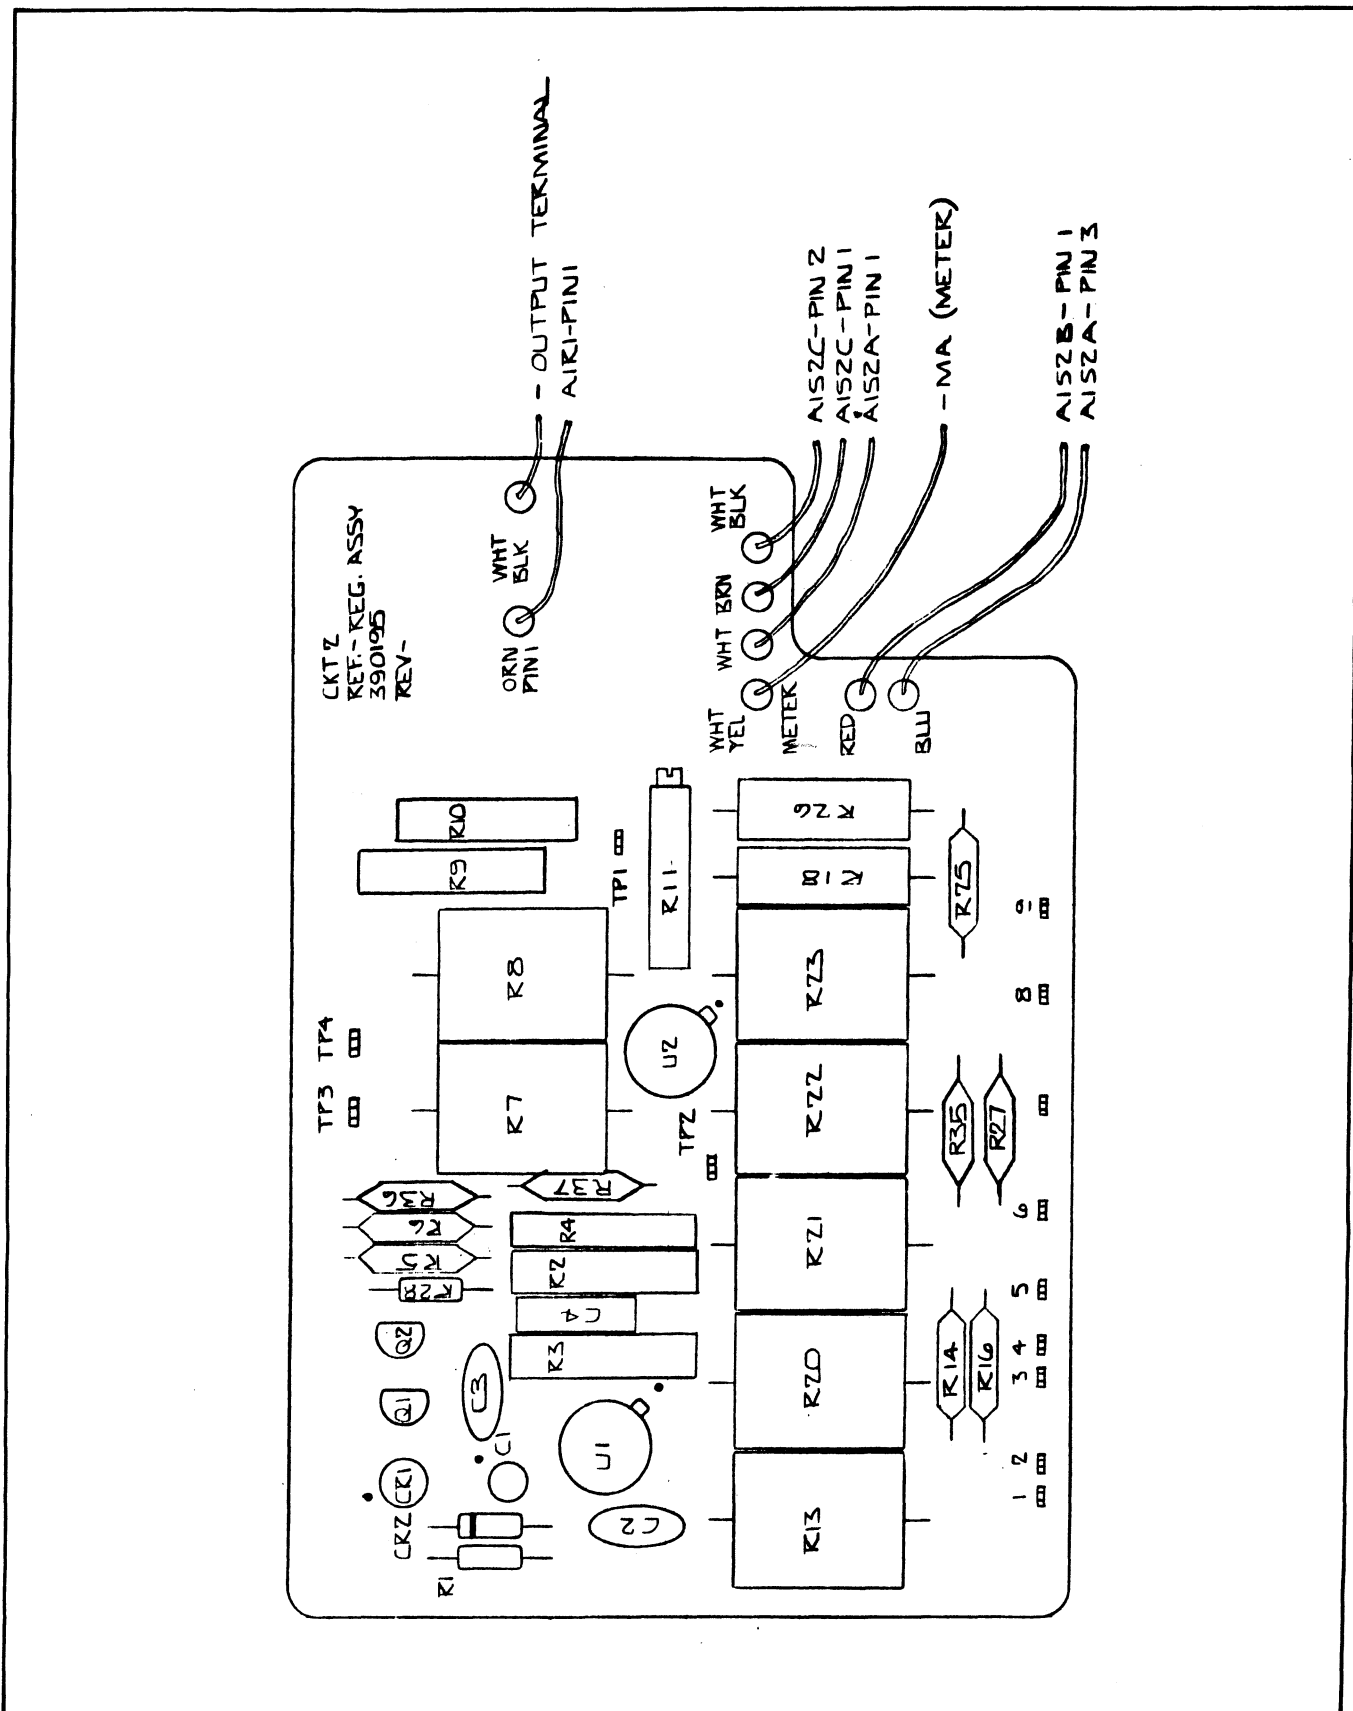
REFERENCE - REGULATOR PCB ASSEMBLY.
